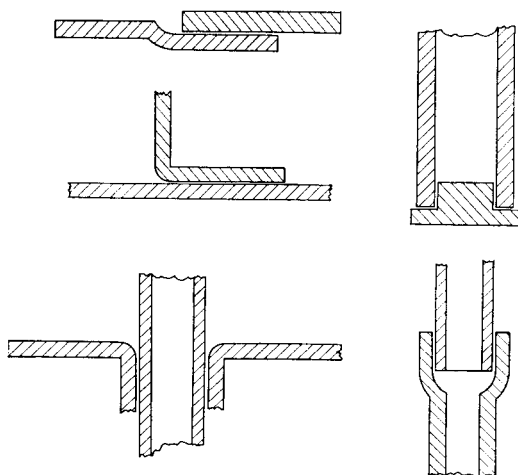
Arrangement of standard parts for brazing and silver soldering.
